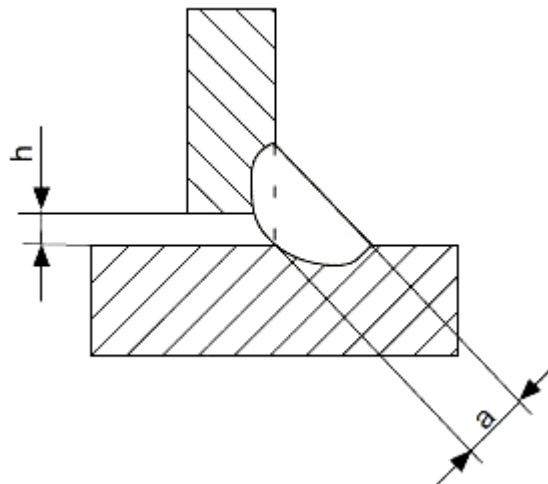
Illustration of gap size (h) and weld size (a).
